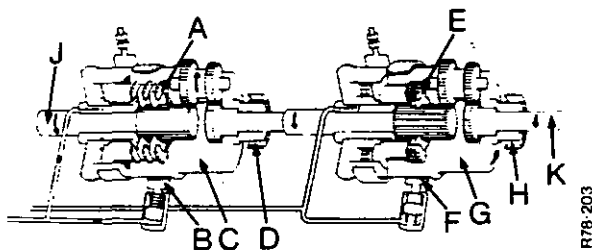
PLANETARY UNITS IN THIRD GEAR
